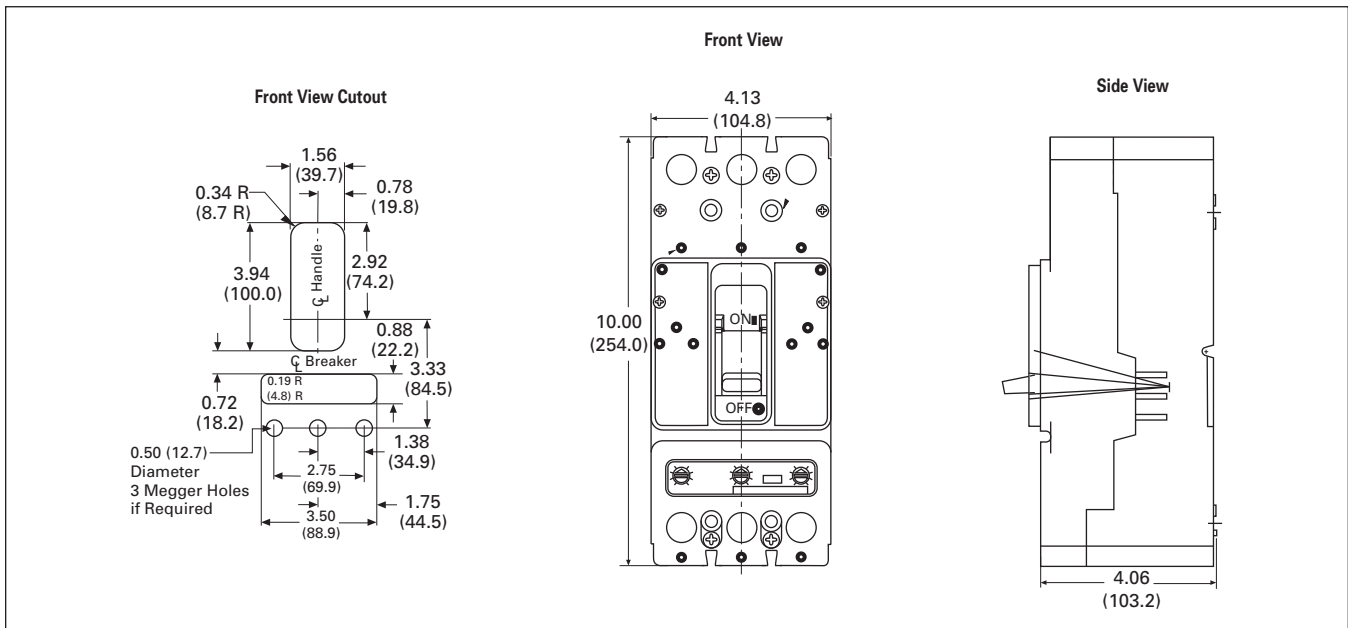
JD-Frame, 3-Pole — Dimensions in Inches (mm)
